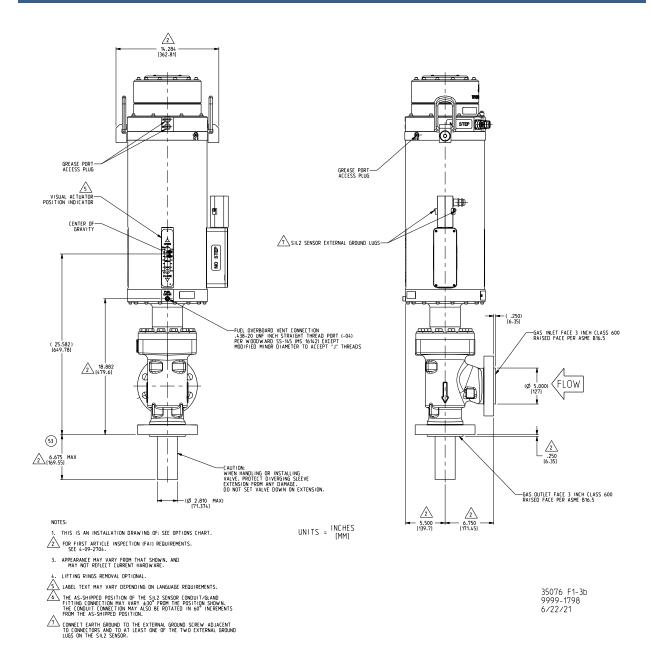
Outline Drawing (3-Inch LESV II Class 600)
